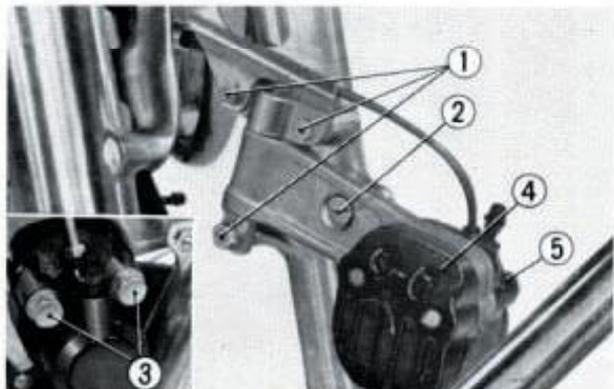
① Oil joint ② Oil joint bolt ③ Brake hose
